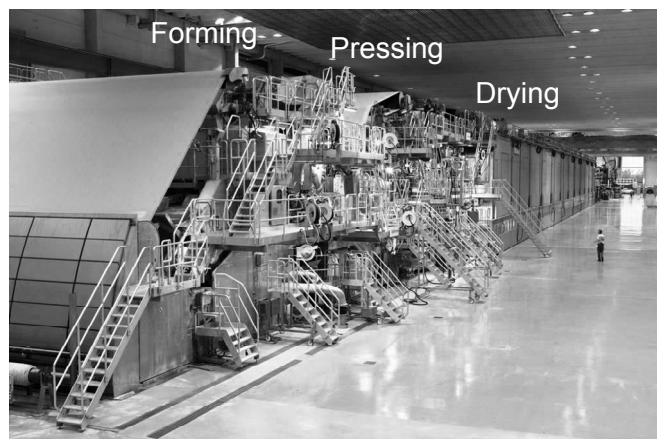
A paper machine producing printing paper with marked forming, pressing and drying sections. Photo: Lasse Arvidsson ©Stora Enso.
